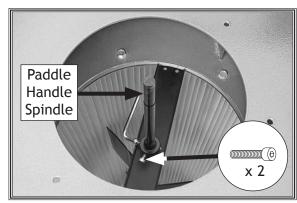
Separating paddle handle spindle from filter paddle spindle.
